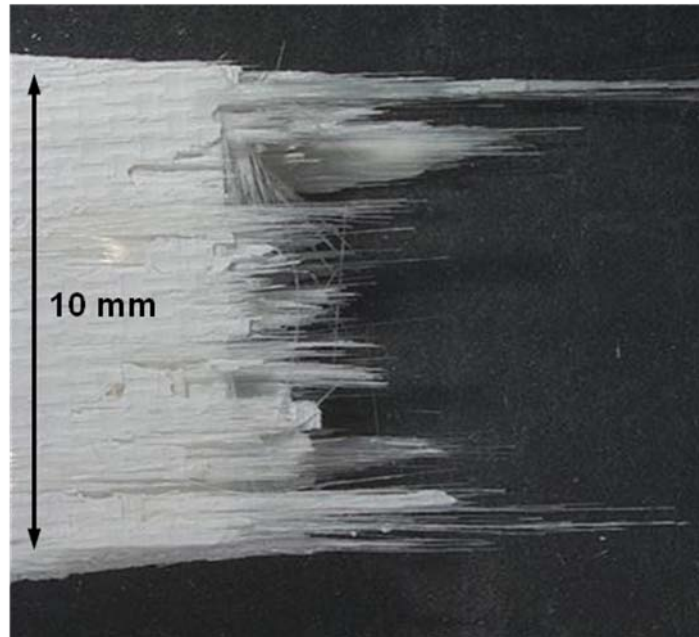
Fracture surface of the N720/AM specimen(2) tested in tension to failure with constant loading rate of 25MPa at 1100°C in steam (side view).
